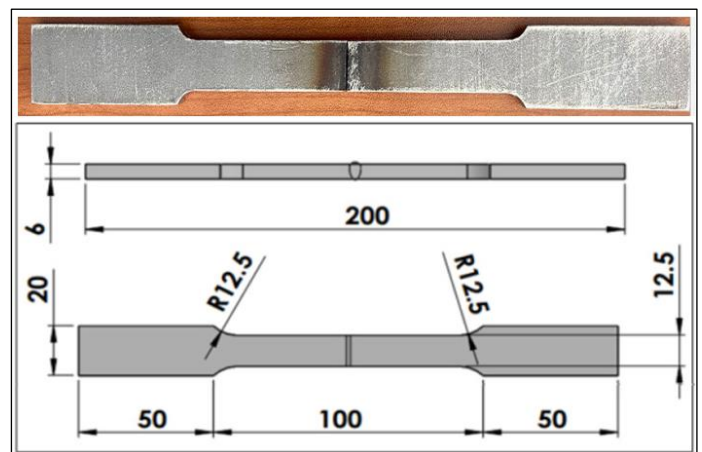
Tensile test specimen (a); dimensions of specimen according to ASTM E8M-04 (b) (units in mm).
